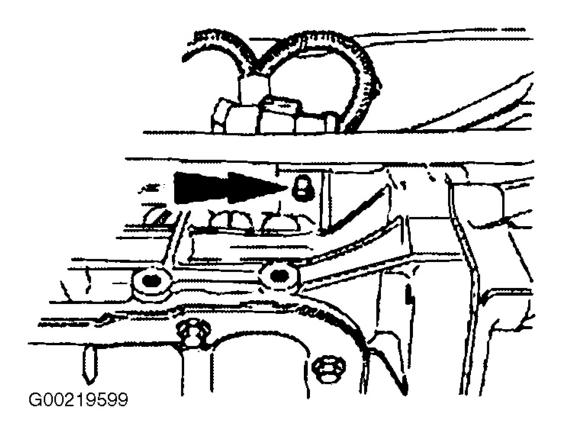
Removing/Installing Oxygen Sensor & Wiring Harness Courtesy of FORD MOTOR CO.
